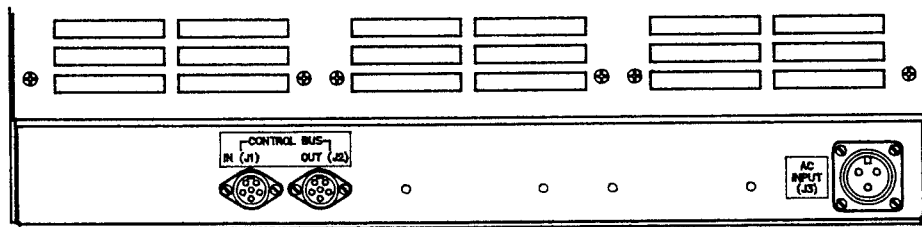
MECHANICAL OUTLINE DRAWING FOR THE RA 51 RACK ADAPTER
